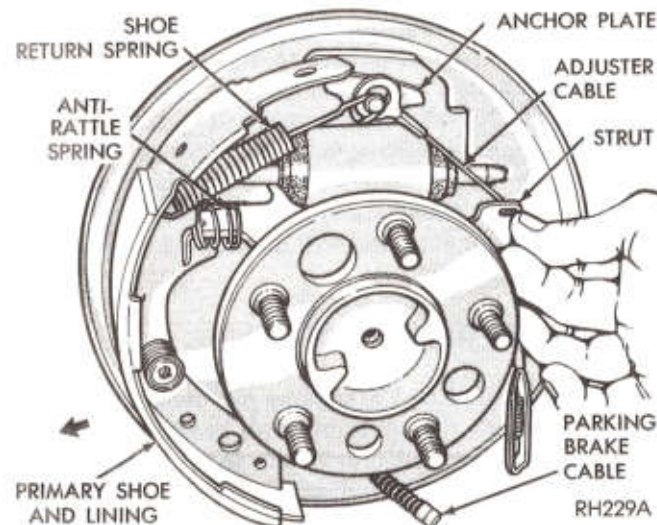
Removing or Installing Parking Brake Strut and Spring
